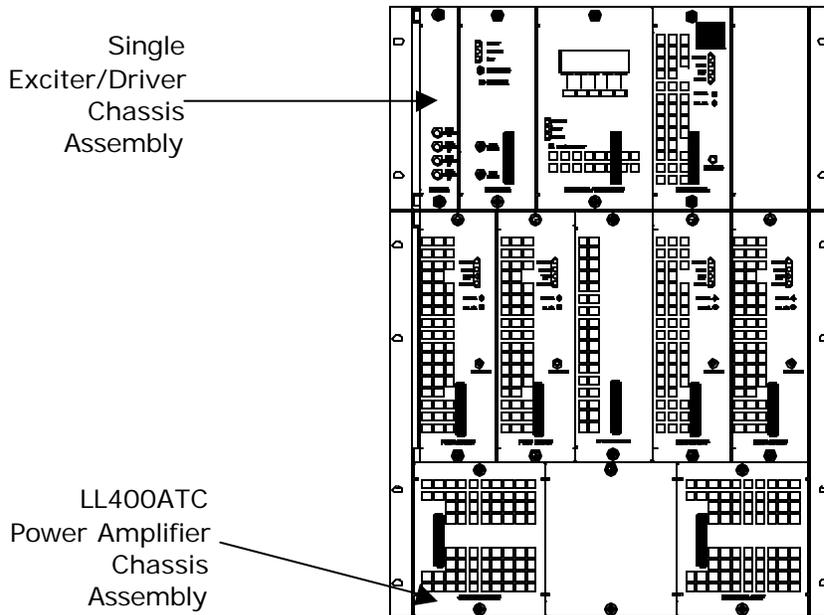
Exciter/Driver Chassis, Single, 1.67 GHz, Front View
